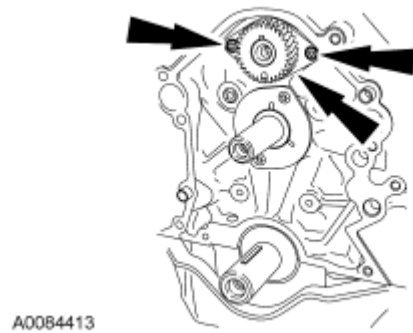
Balance Shaft Driven Gear, Thrust Plate & Bolts
